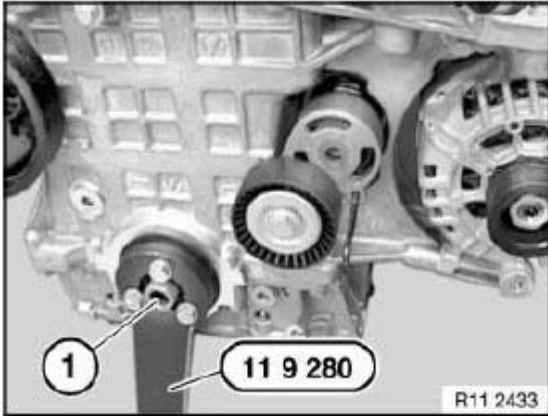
Identifying Central Bolt With Special Tool 11 9 280
